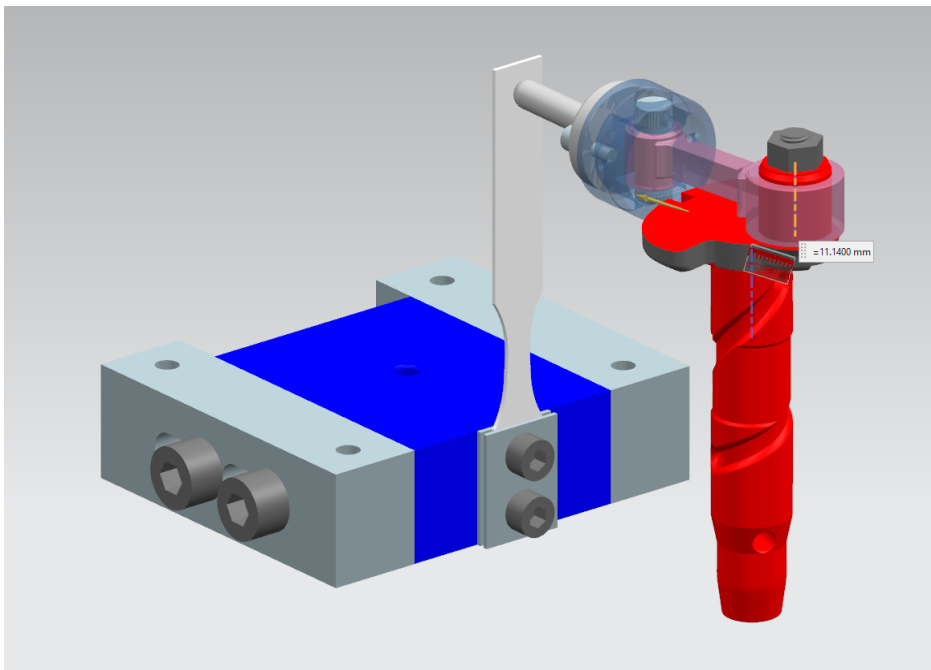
Fixation of Fatigue Specimen to Fatigue Test Machine
